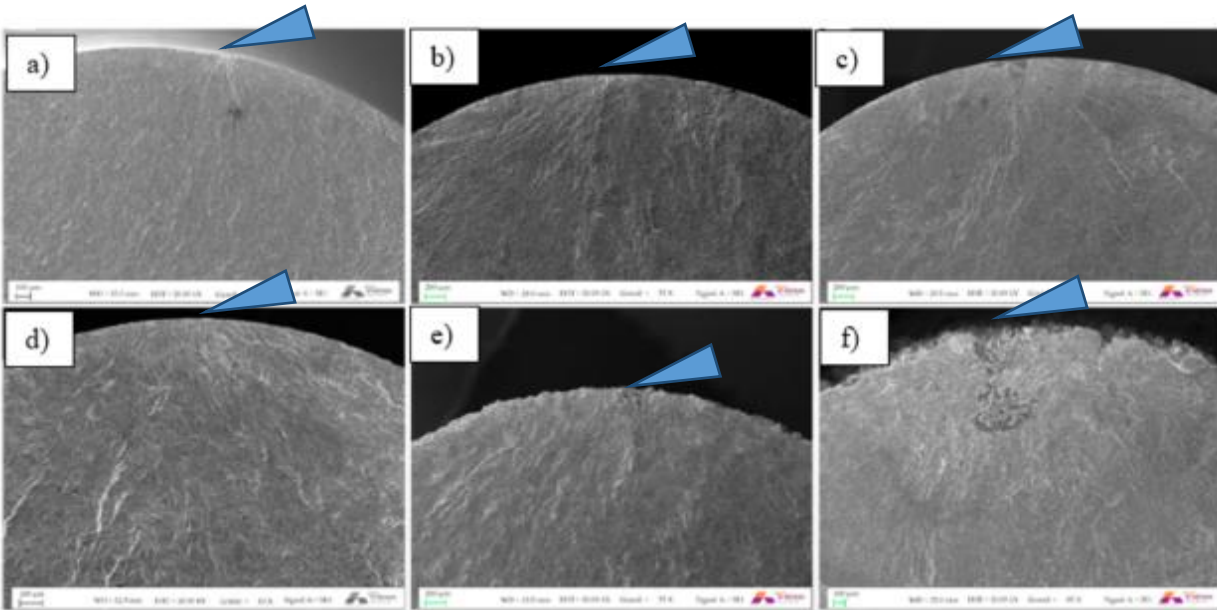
Typical initiation site for a) hot rolled, b) EBM HIP machined with no defect c) EBM machined with remaining defect d) SLM HIP machined e) SLM as-built f) EBM as-built [23]
